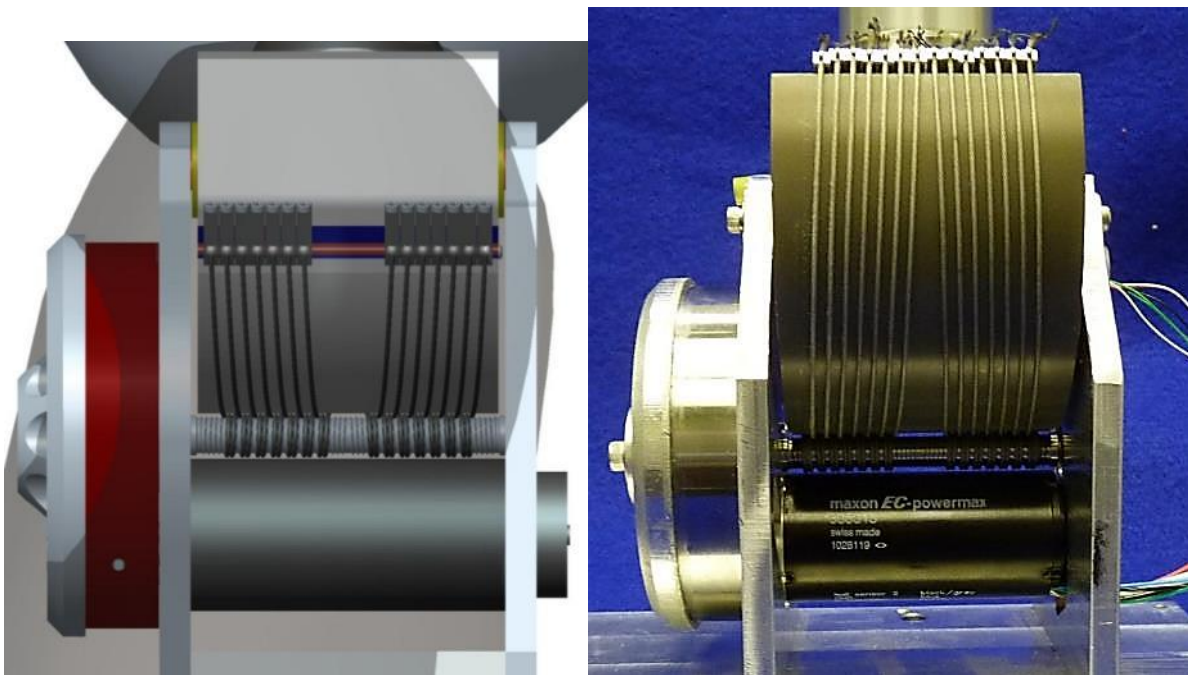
CAD model of cable drive and traction drive (left) and photograph of working prototype (right).
